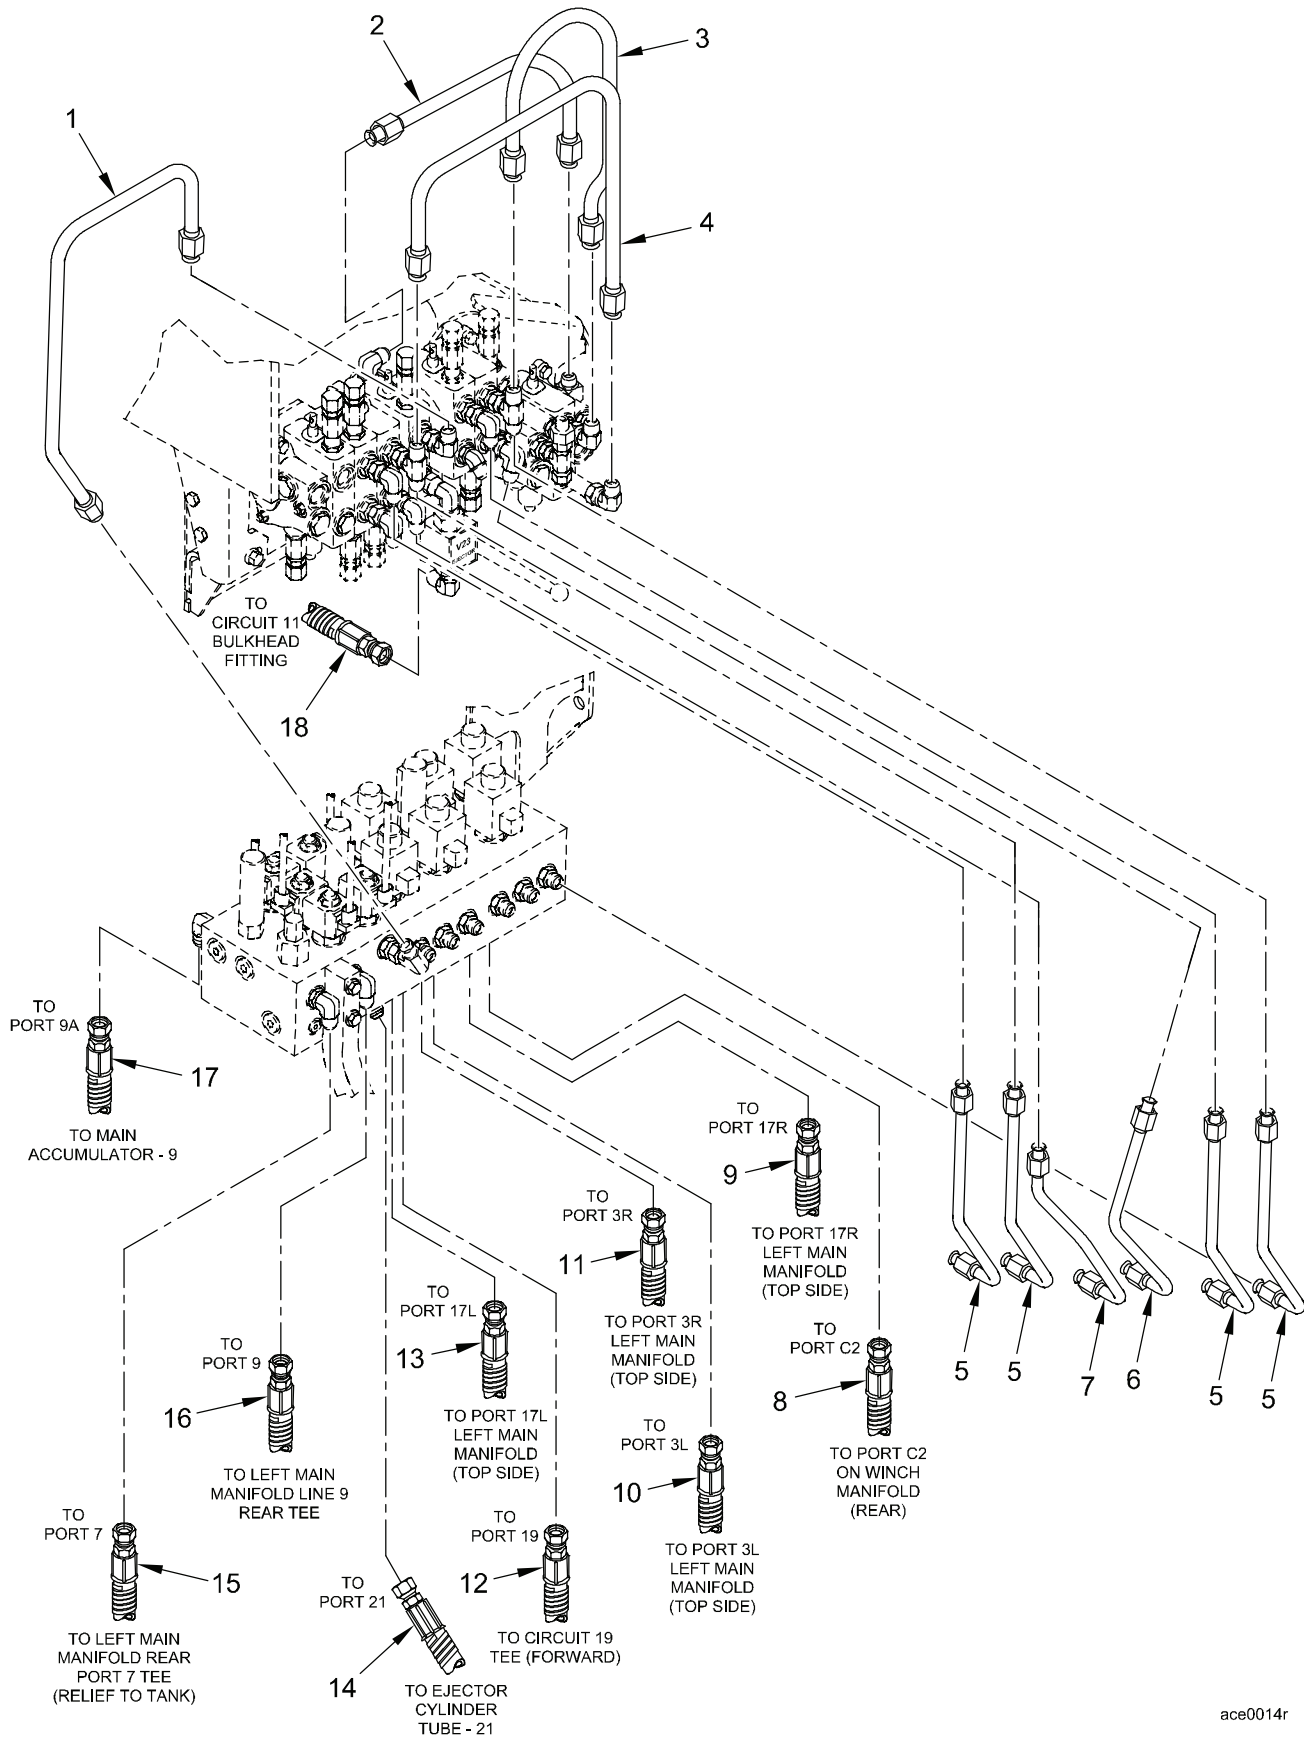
HDC Primary Manifold Assembly Hydraulic Tubes and Hoses
